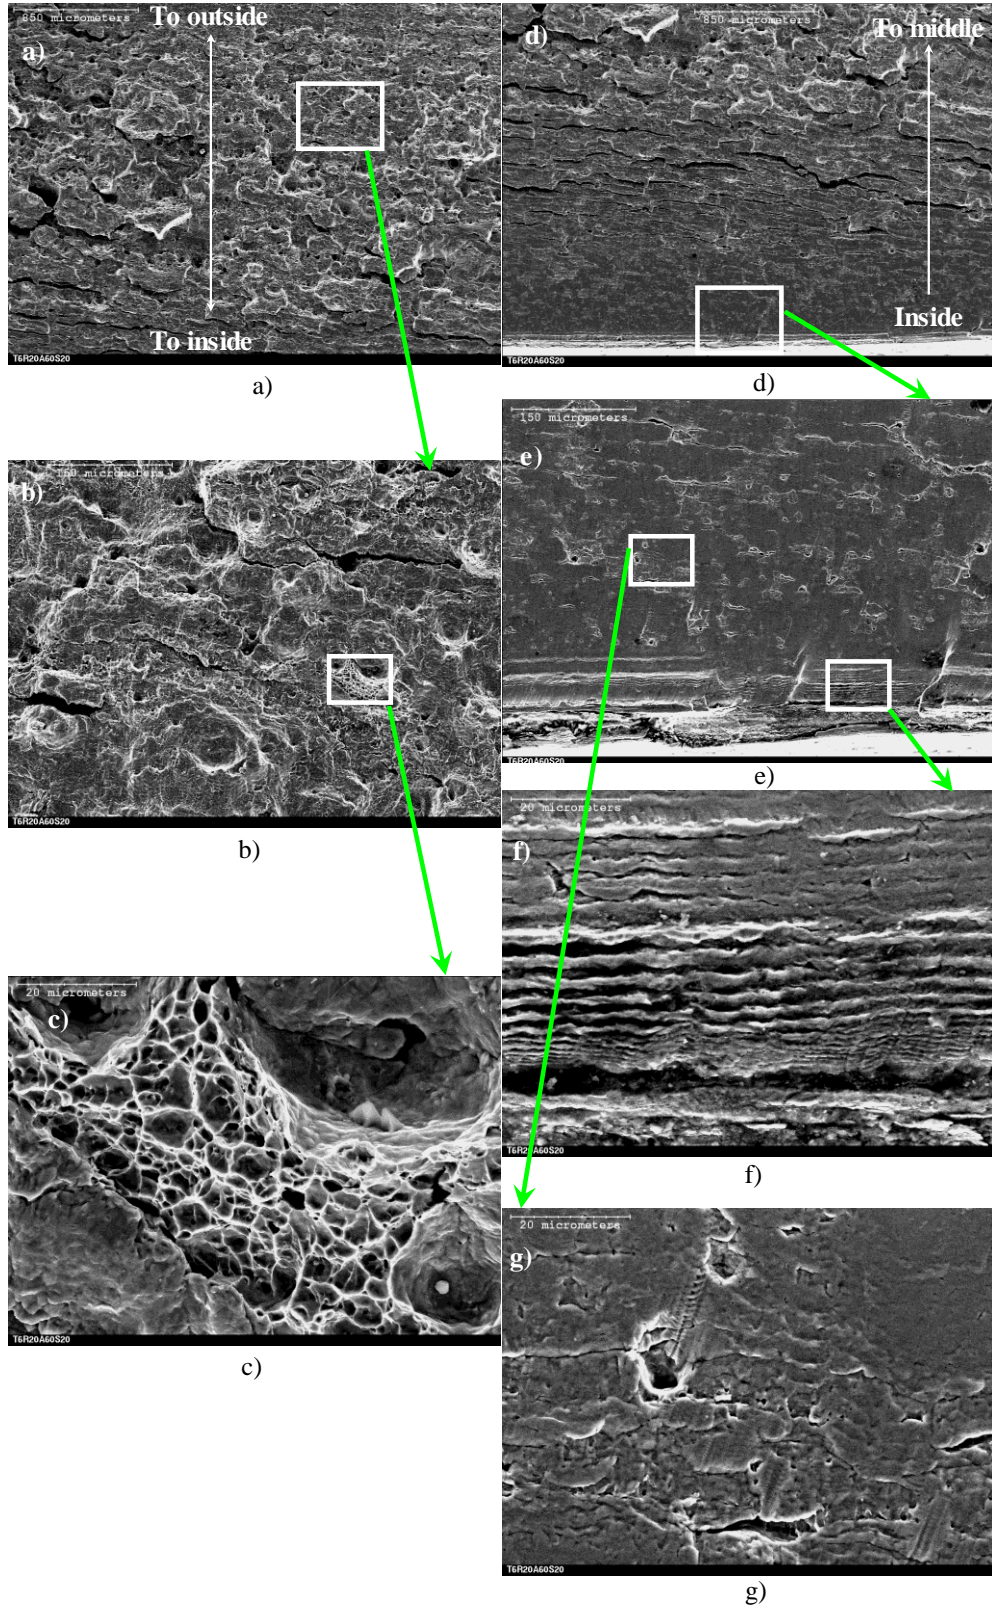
Bottom half of the fracture surface of specimen T6R20A60S20 (SEM)
